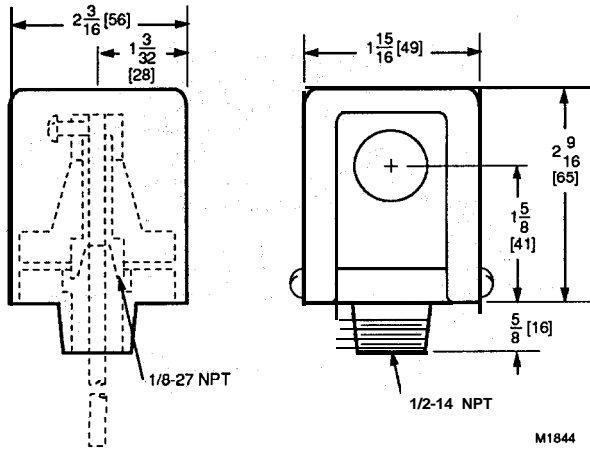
Dimensions in inches [mm] of C7008A flame rod assembly.
